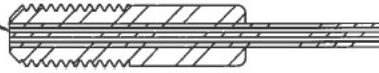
HORIZONTAL CABLE RAILING ASSEMBLY
